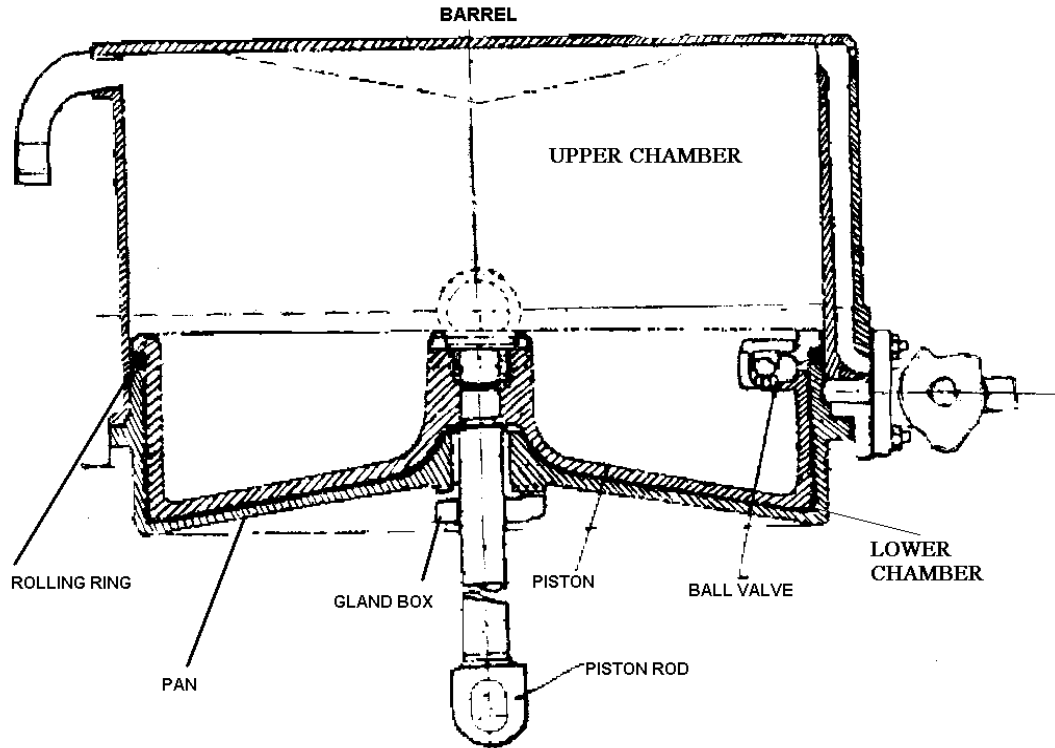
VACUUM BRAKE CYLINDER ("F" TYPE)
